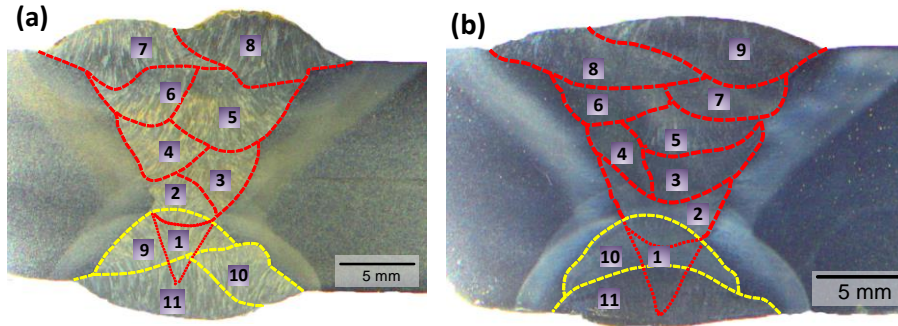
The multipass butt welded joints schemes considering the back-chipping processing. (a) Evenmatched welds, (b) Undermatched welds.
